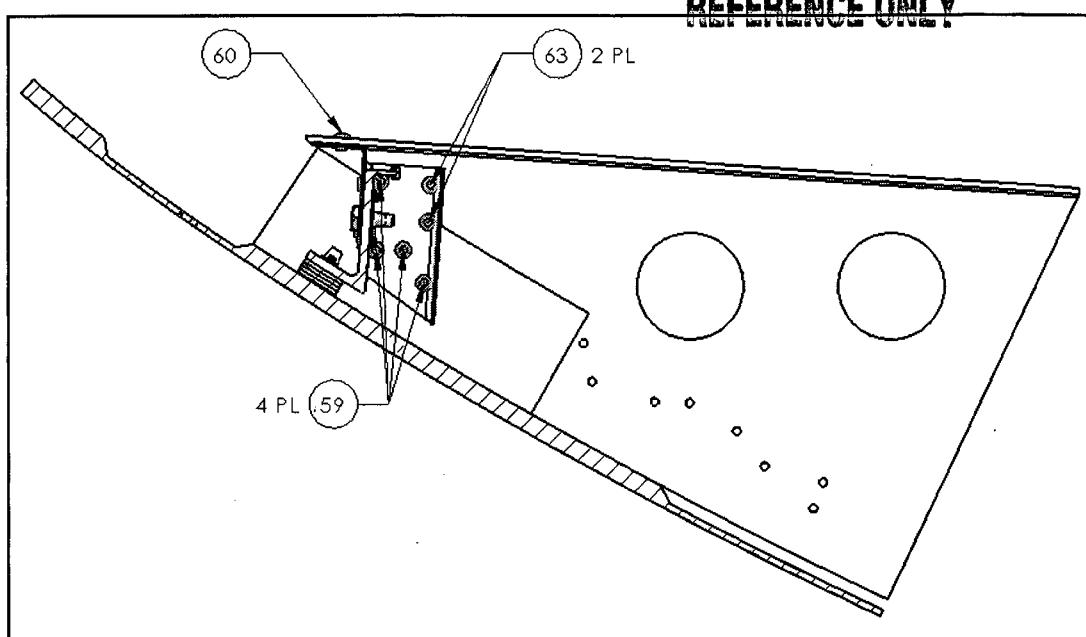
Rivet Locations on Airframe for Fwd Intercostal Assembly
